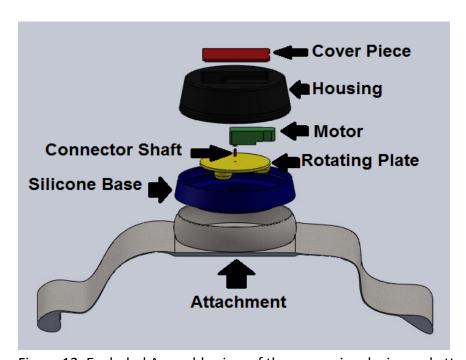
Exploded Assembly view of the massaging device and attachment mechanism
